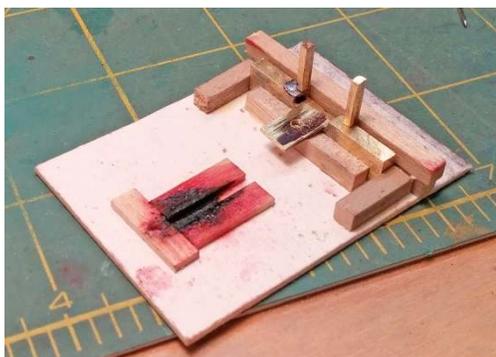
A simple jig made to hold the foot board hangers in place while being soldered to the end beam.
